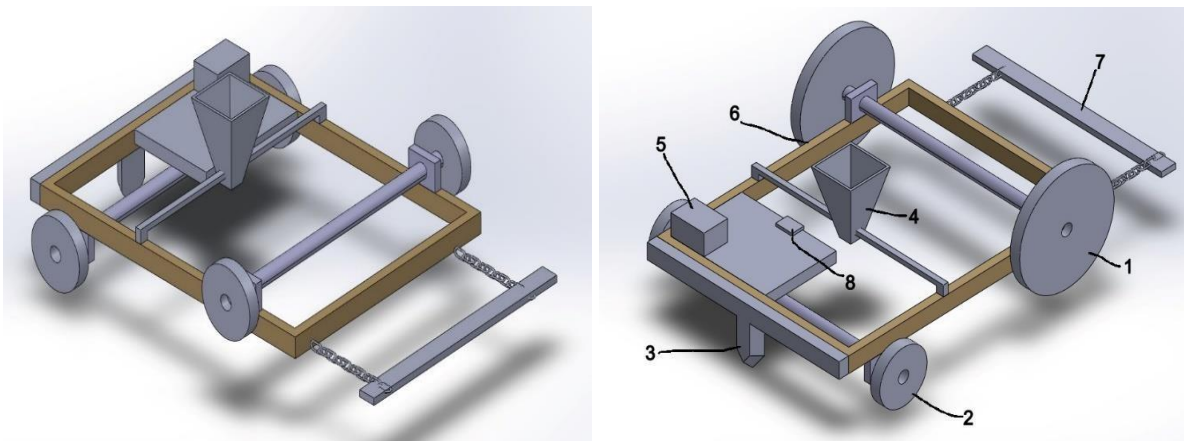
CAD Model of Integrated Seed Sowing Machine.
